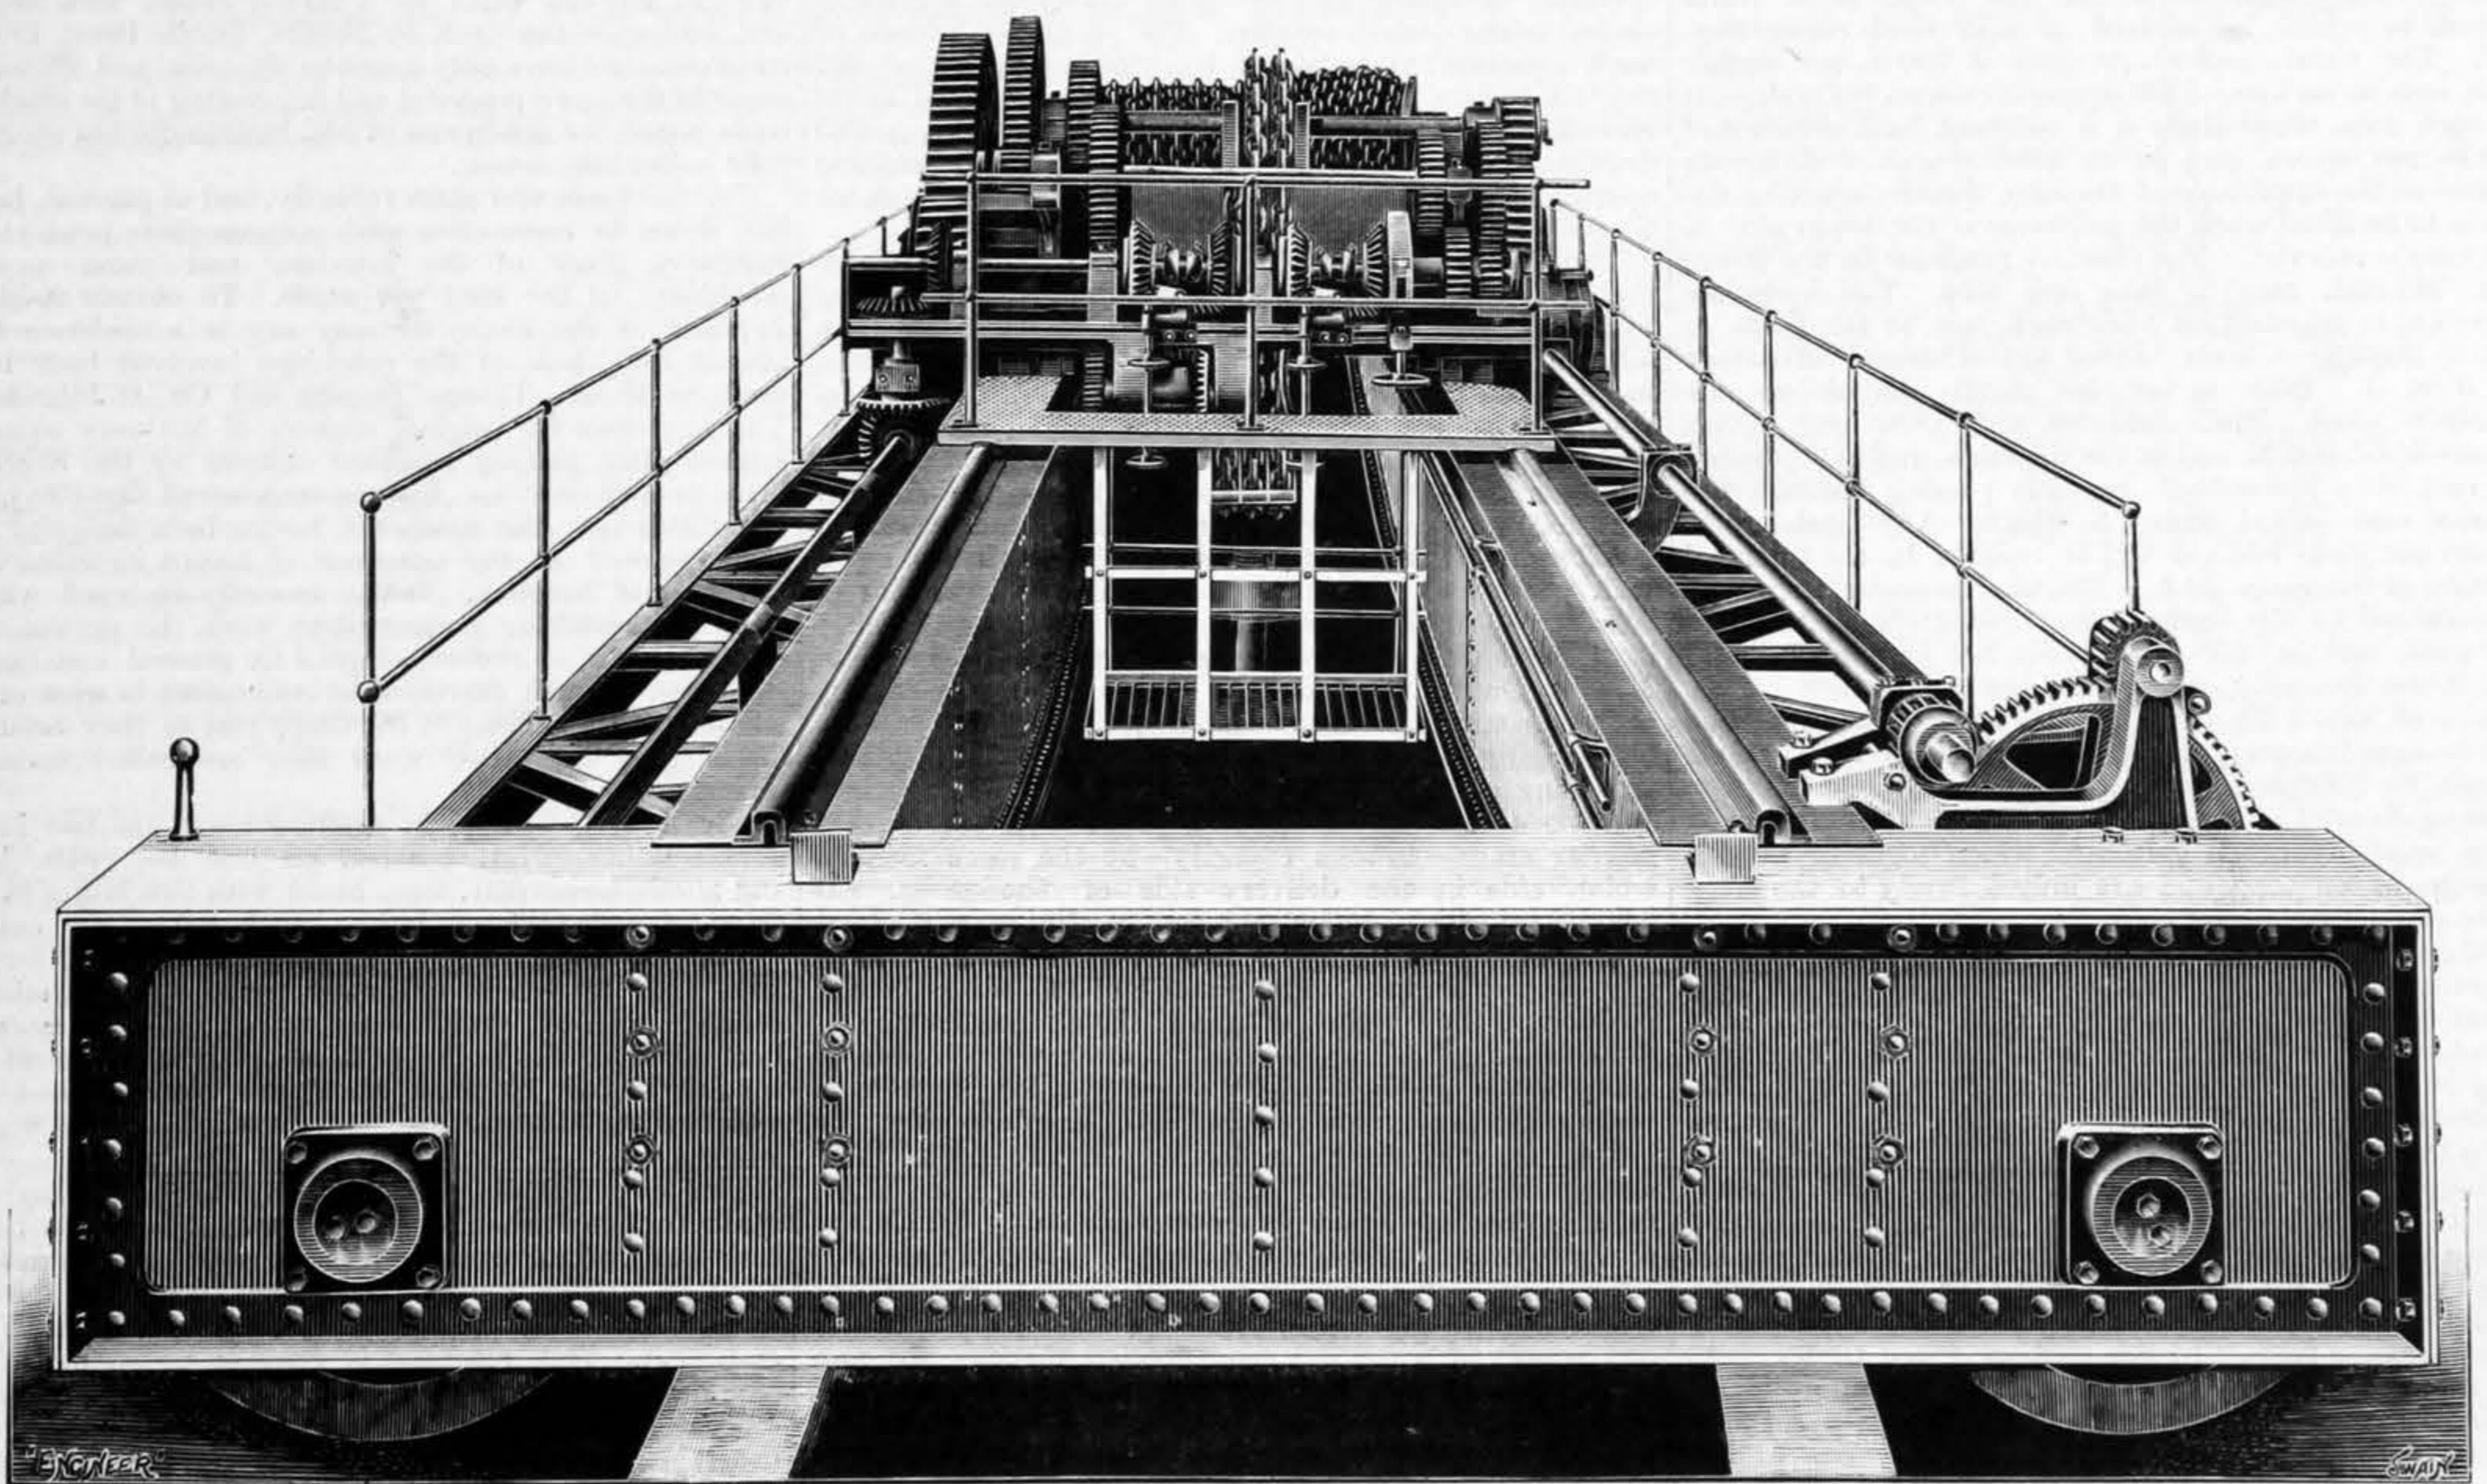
100-TON TRAVELLING CRANE FOR SERVING FORGING PRESS
